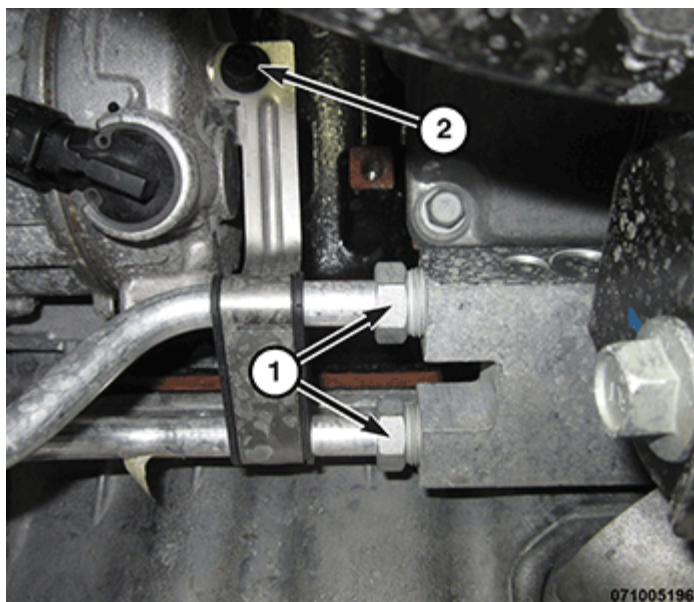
Rear Transmission Cooler Lines, Bracket & Bolt
